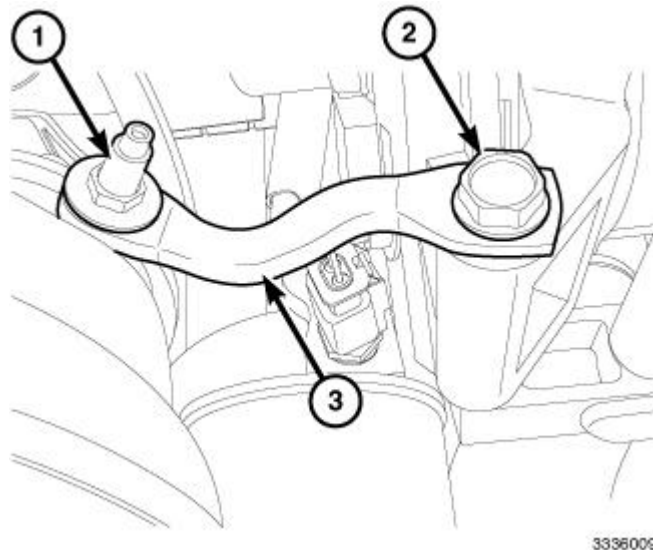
Engine Mount Isolator Retaining Nut, Generator Support Bracket & Retaining Bolt
